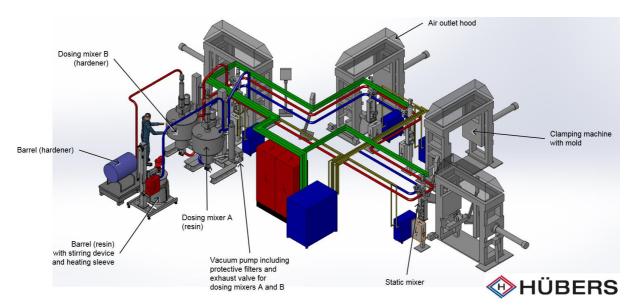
CAD rendering of an APG system with 4 Clamping Machines. Source: Hübers
